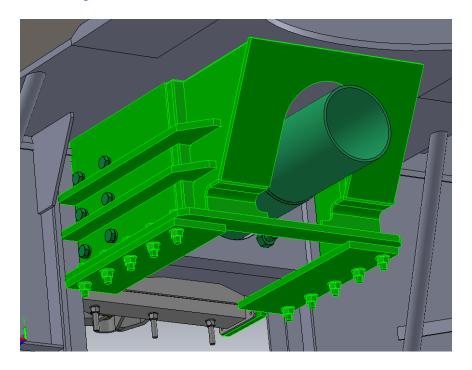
Modified draft pocket design with cut-out at bottom of angled back plate for truck transom clearance
